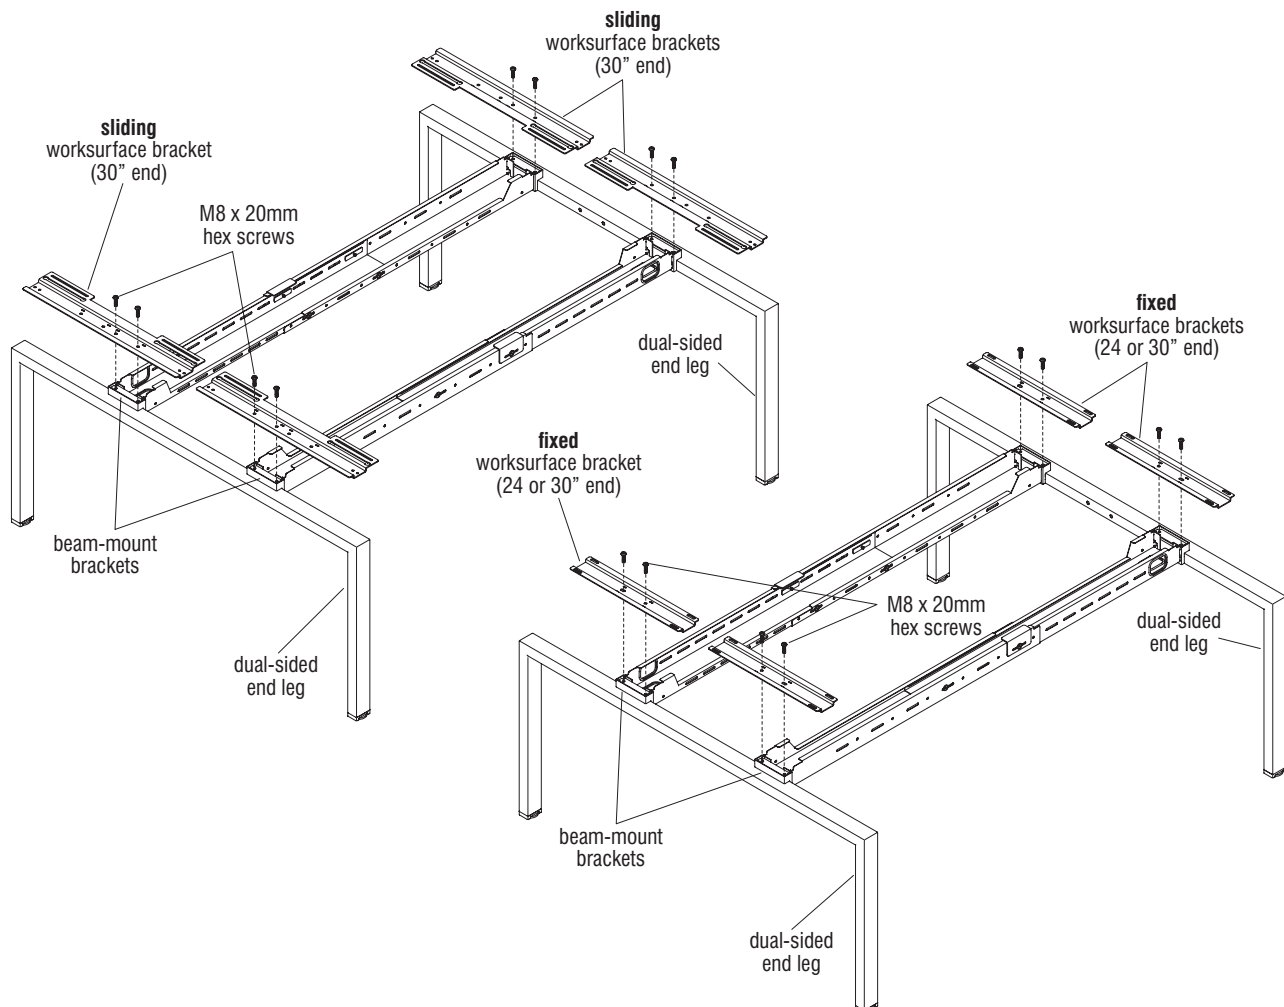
Dual-Sided Stand-Alone Benching - Worksurface Brackets
